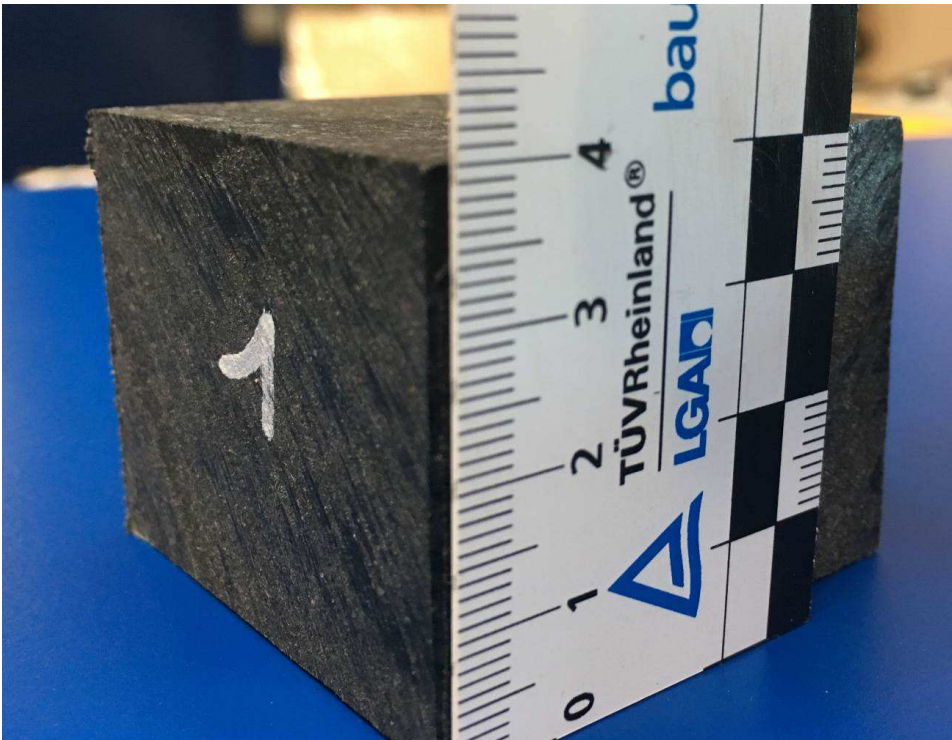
Plate Type 1: Dimensions: 50 mm x 50 mm x 40 mm, test specimen 1
